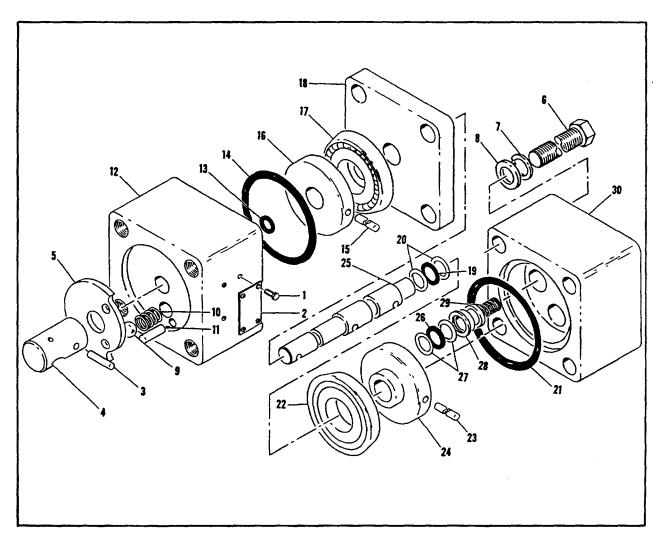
Hand Driven Reciprocating Pump Assembly L. H. & R. H.
